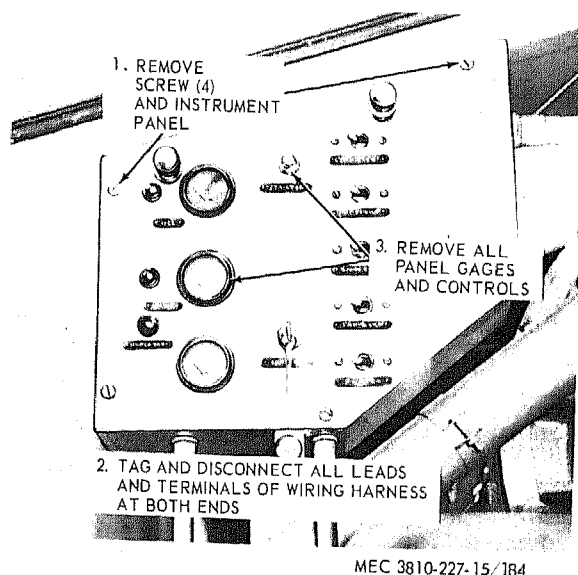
Crane instrument panel and wiring harness, removal and installation.
